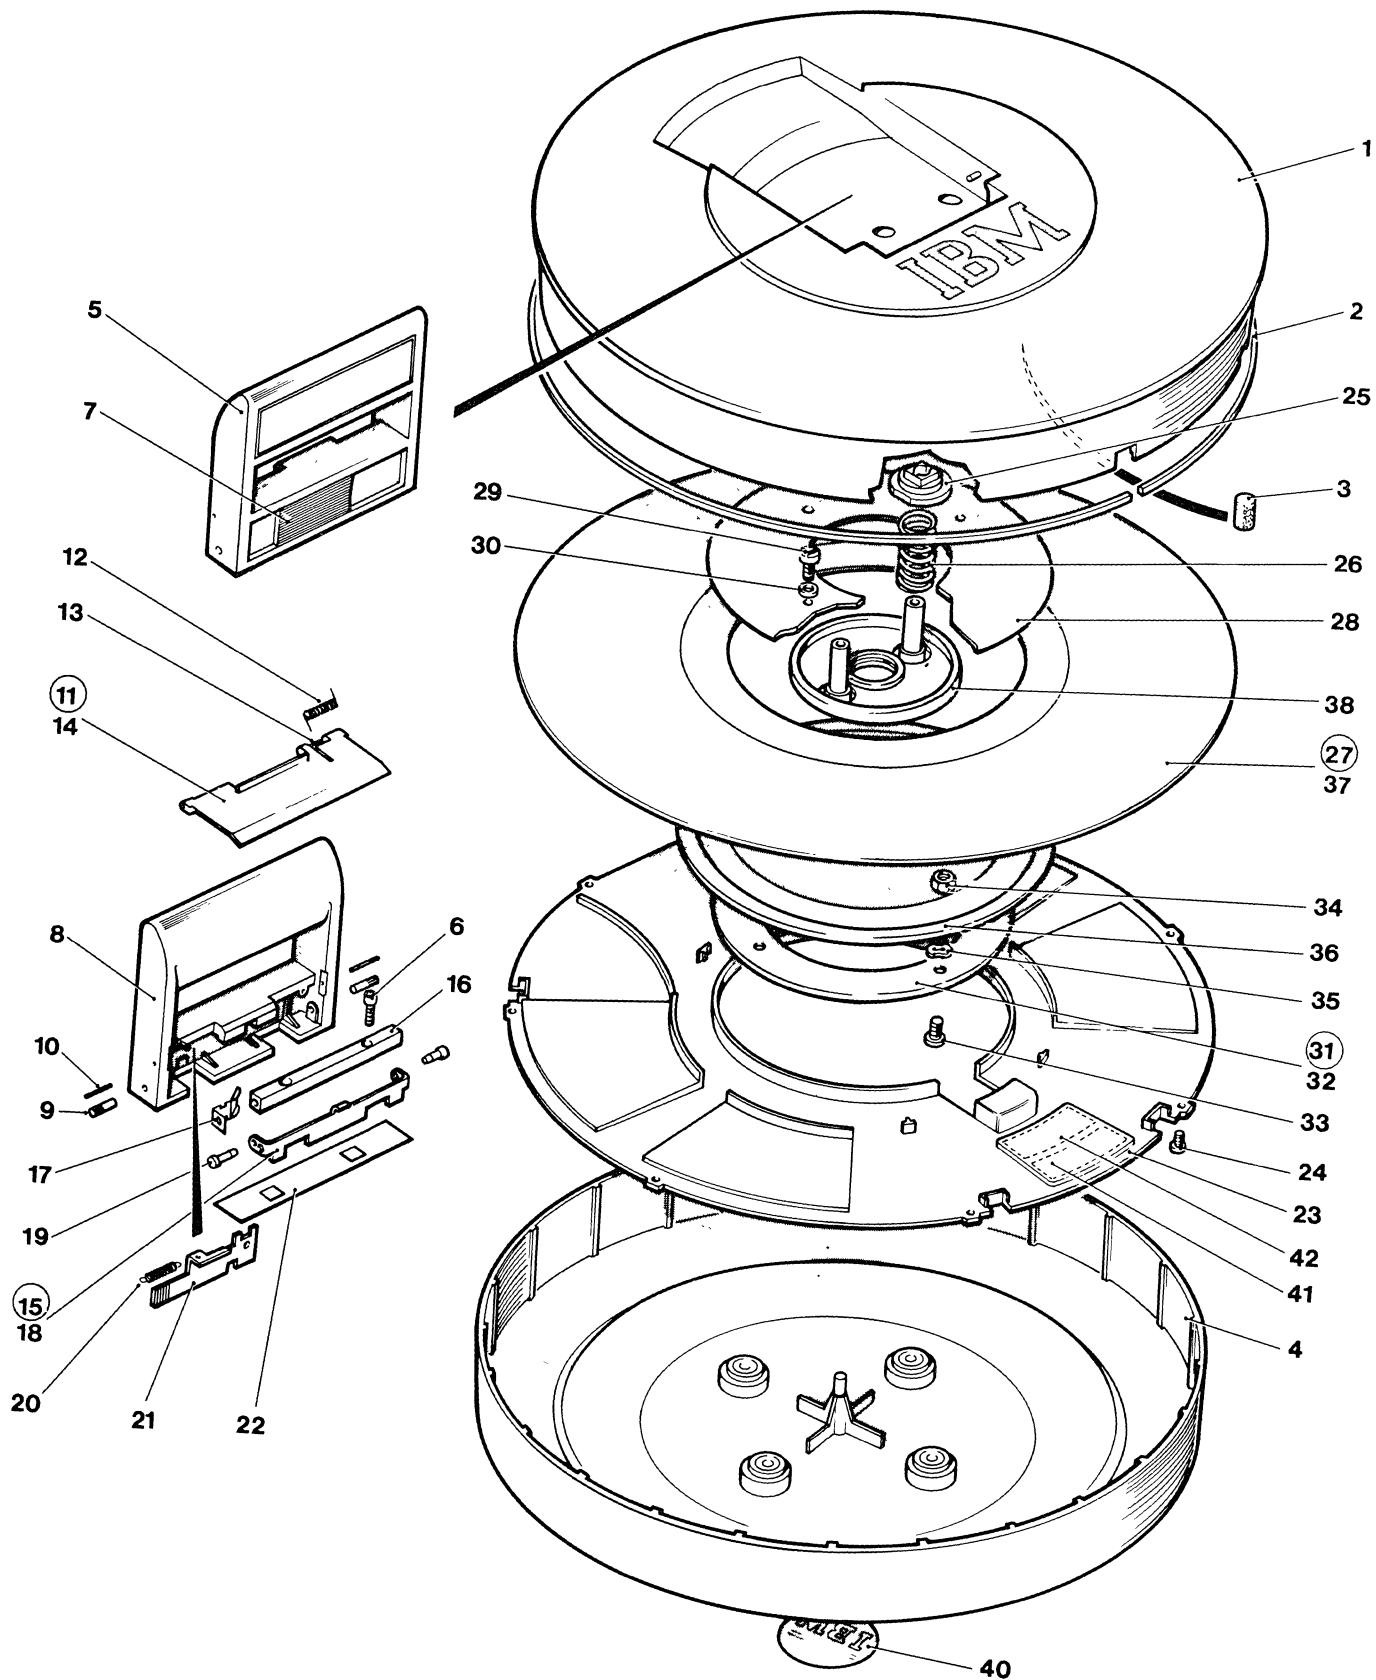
5440 CARTRIDGE ASSEMBLY
